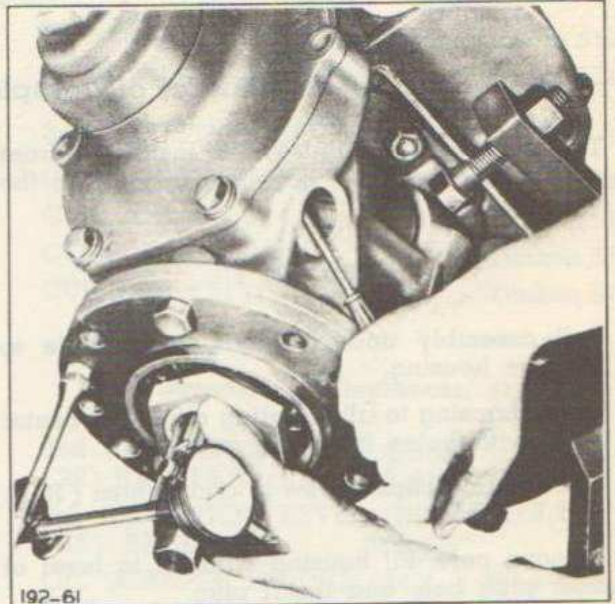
Checking Backlash of 2nd Reduction Gear Set with Dial Indicator
